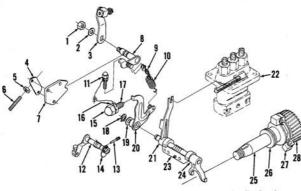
Exploded view of fuel control system used on Yanmar marine diesel engines.
